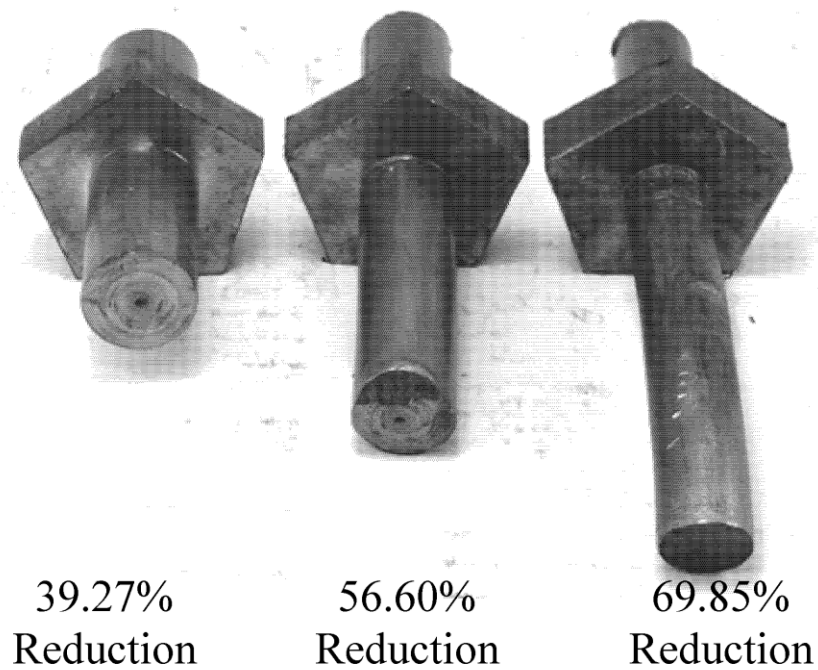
Extruded forward-backward extrusion-forging pentagonal head shaped product
